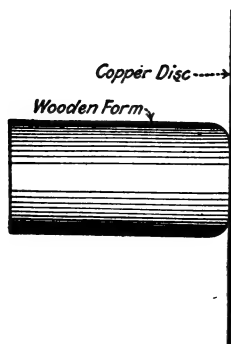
The copper disc mounted on the wooden block or form to make the copper cup shown in Fig. 145.
